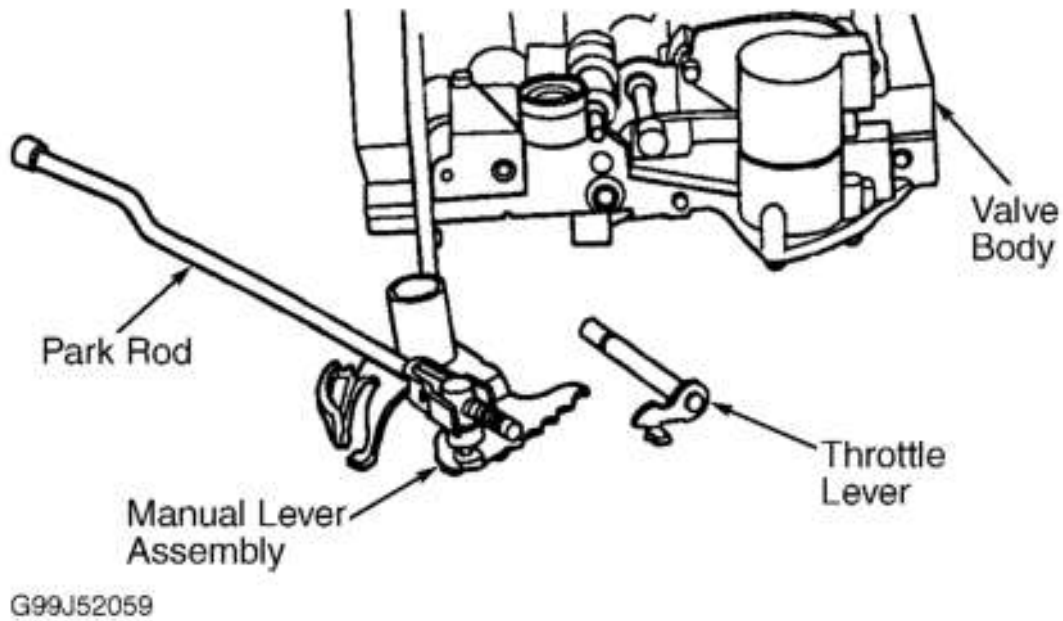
Identifying Manual Lever & Throttle Lever Assemblies
